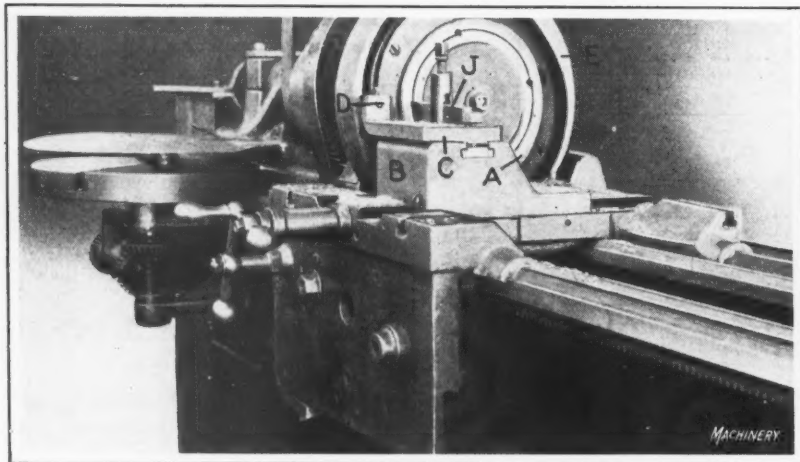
Lathe equipped for cutting Elliptical Grooves in Washers
